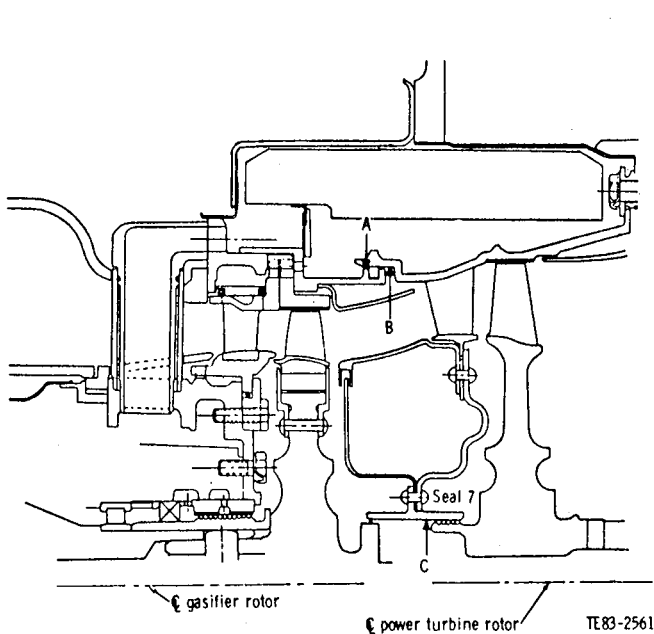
Measurement locations for checking engine block distortion for engine C-4, TD14.
